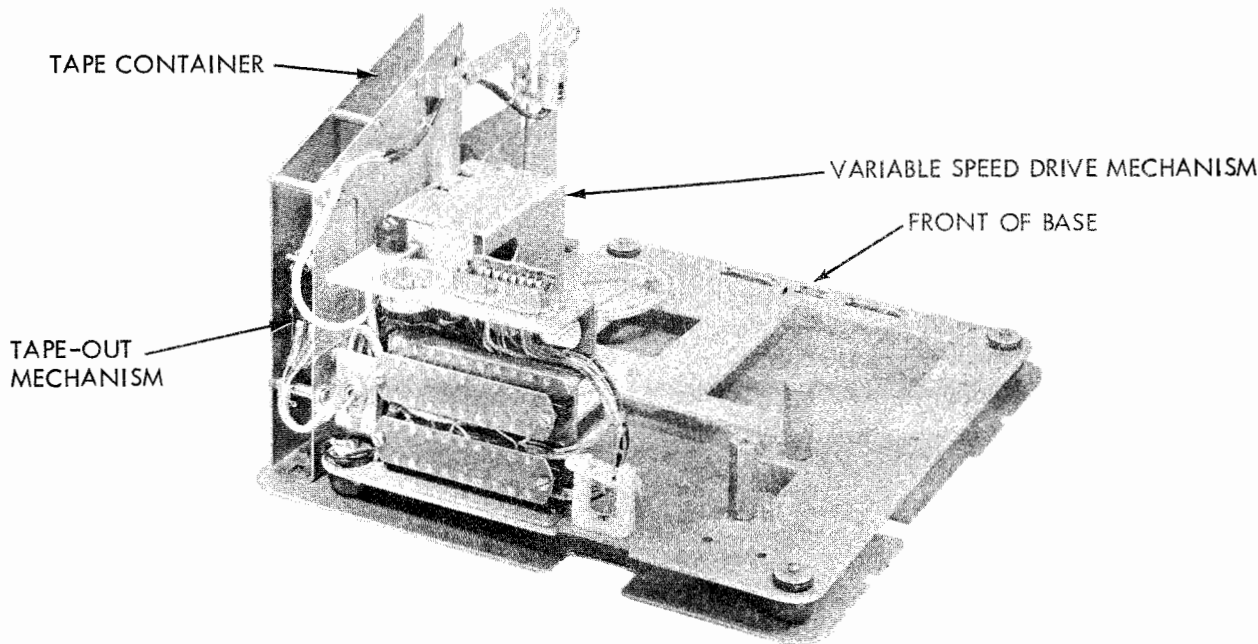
28 Receive-Only Reperforator Base (Rear View)
